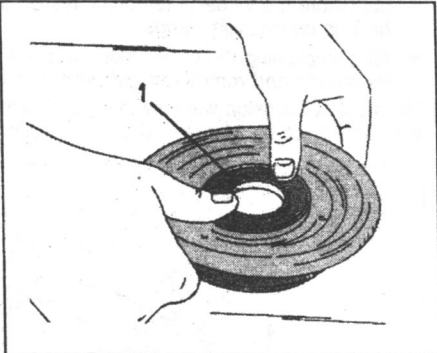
Fitting the needle thrust bearing (1) into the upper spring cup.
